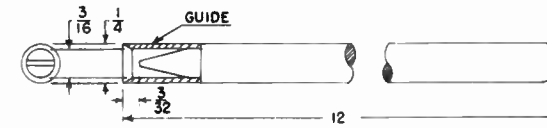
OSCILLATOR ADJUSTMENT TOOL
